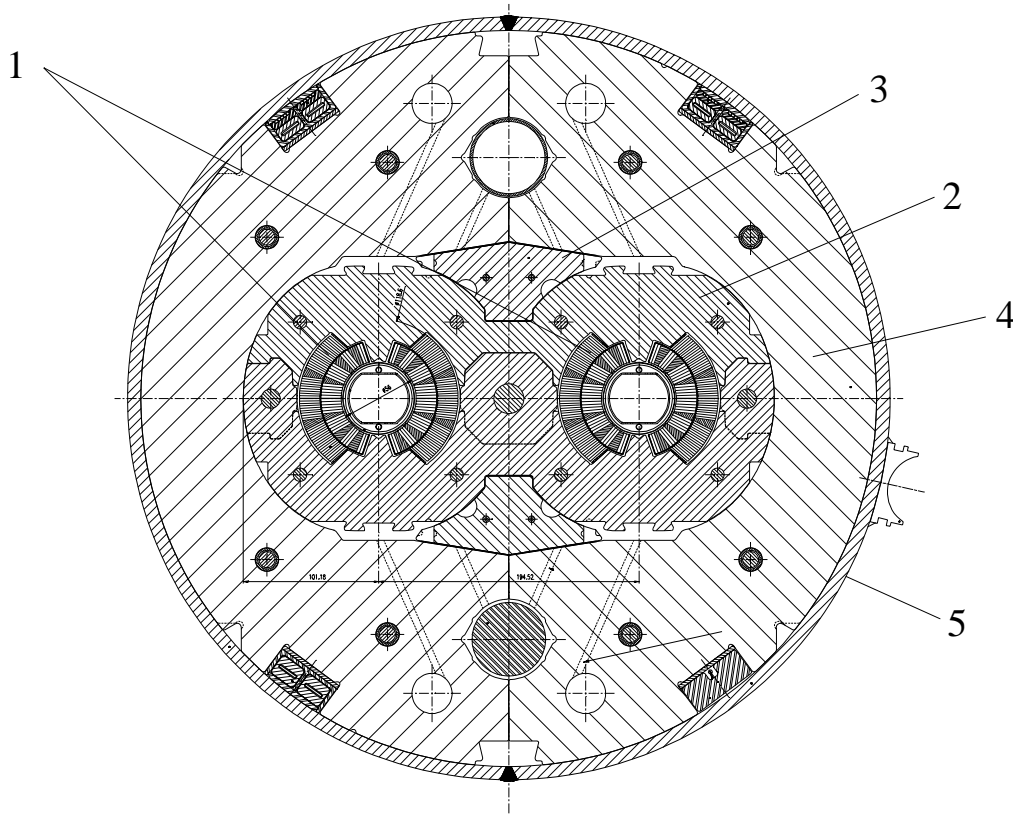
Dipole cold mass cross section: 1 - superconducting coils; 2 - austenitic stainless steel collars; 3 - ferromagnetic insert; 4 - iron yoke; 5 - shrinking cylinder.
